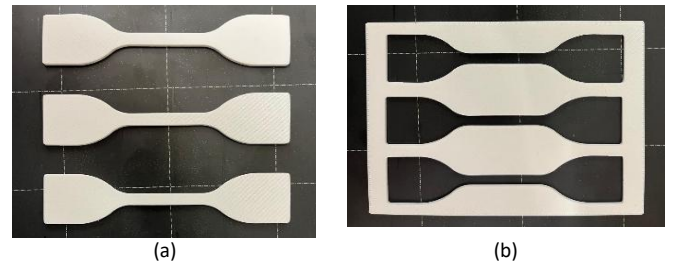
Uniaxial tensile test samples: (a) Stamped specimens and (b) corresponding plate.
